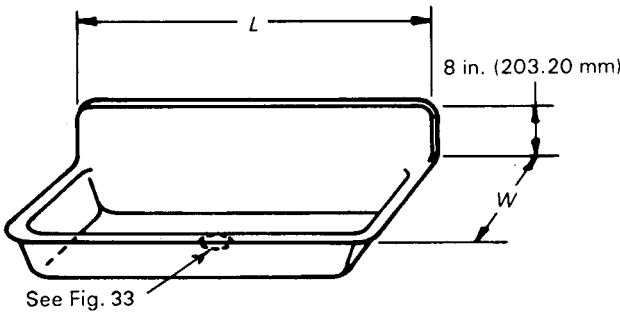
KITCHEN SINK OUTLET DIMENSIONS
